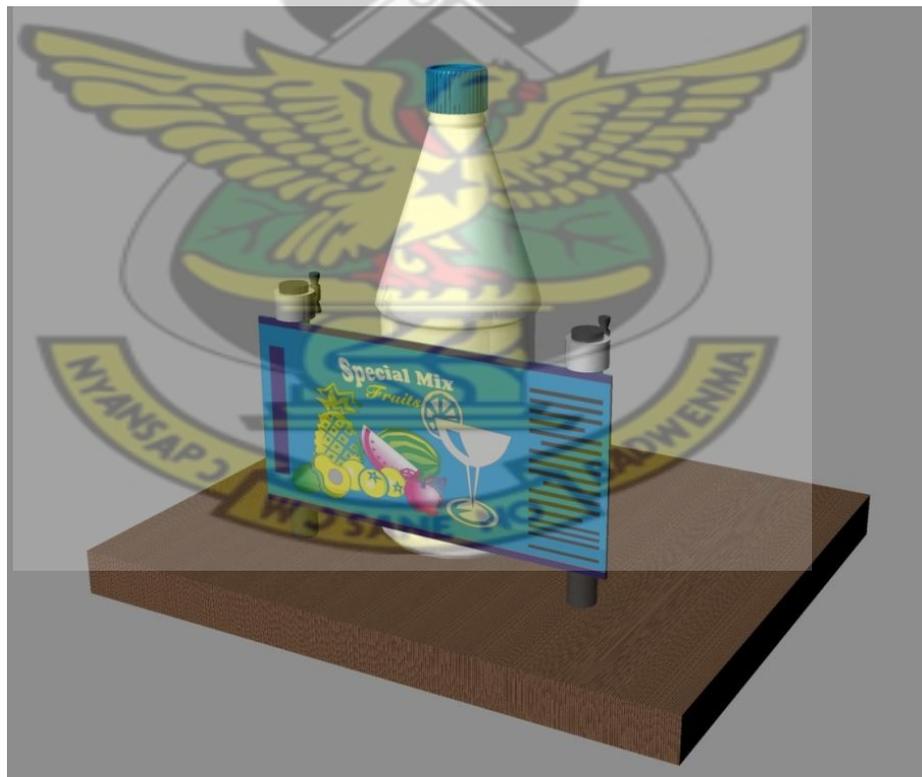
An illustration showing a label material attached to the label holders of the jig
